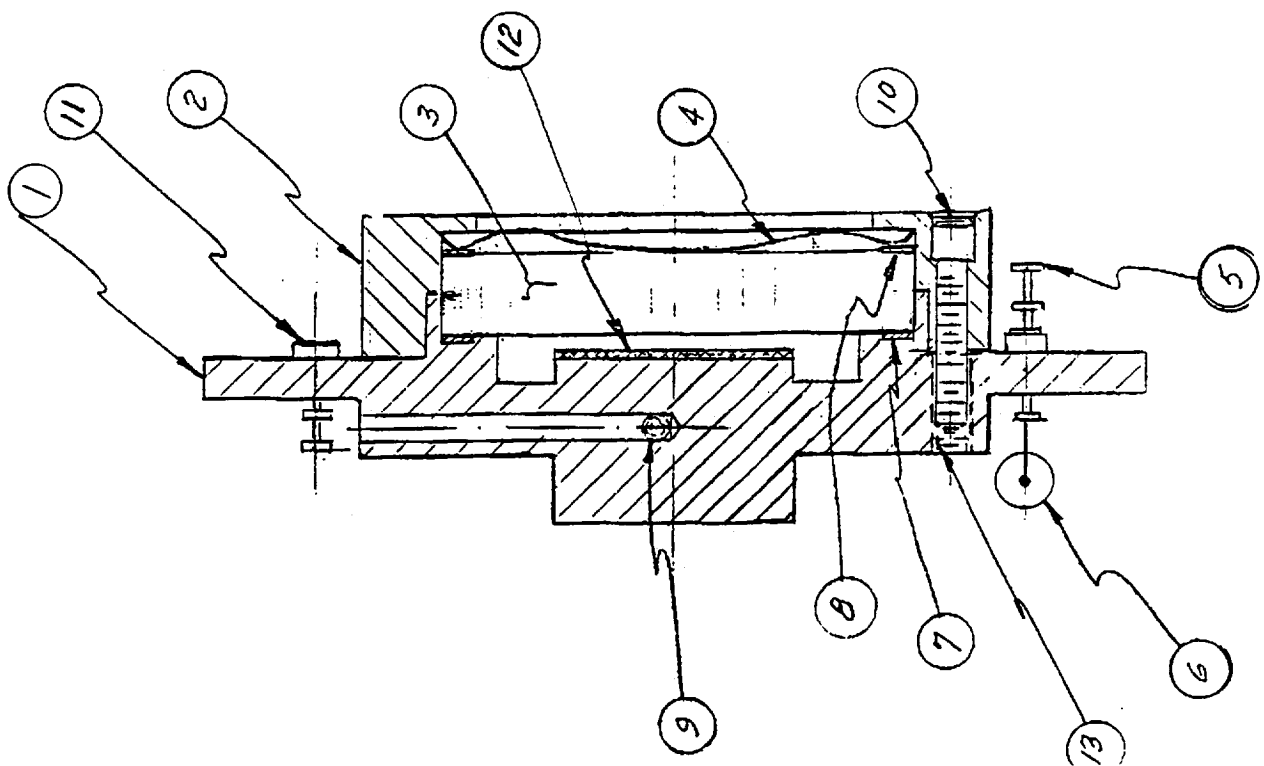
Cross-Section of AO147 Filter Assembly - Item #7 is the Indium Washer, #3 the Glass Filter, and #1 the Aluminum Base Plate.
